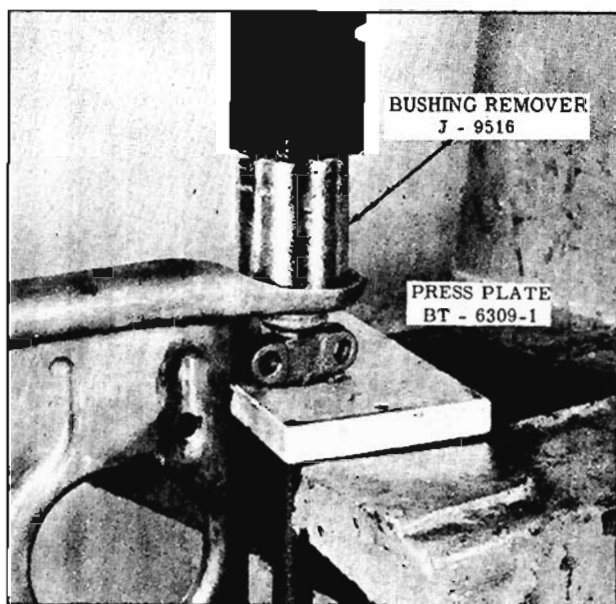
Partial Pivot Shaft Bushing Removal
